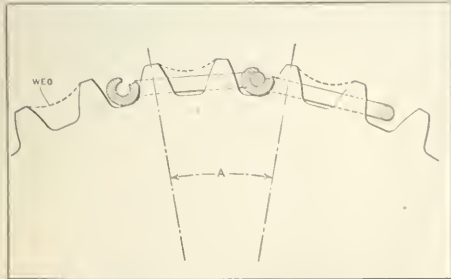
Two Short Teeth used in Place of One Long Tooth
